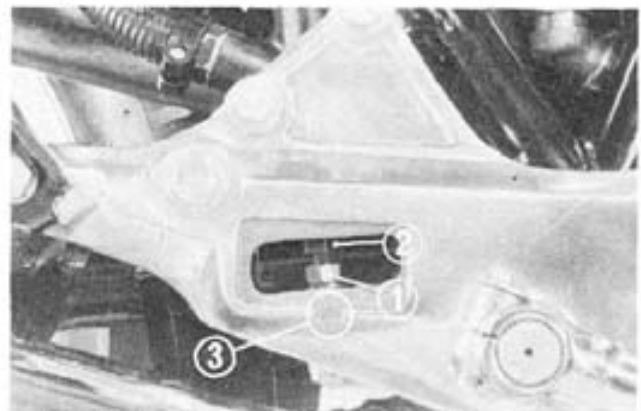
① Lock nut ② Adjuster ③ Groove
